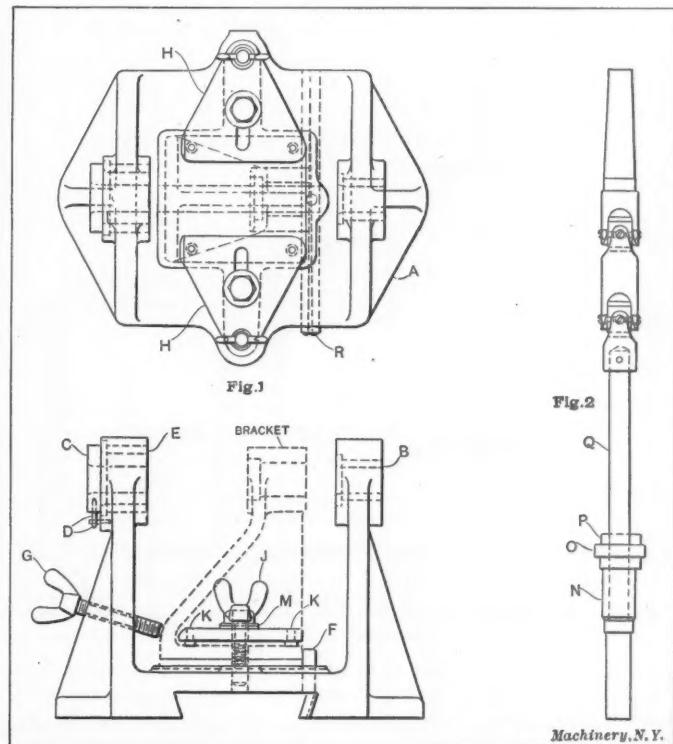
Fixture used on the Lathe for Boring out Brackets. Fig. 2. Boring-bar used in Connection with the Fixture shown in Fig. 1
